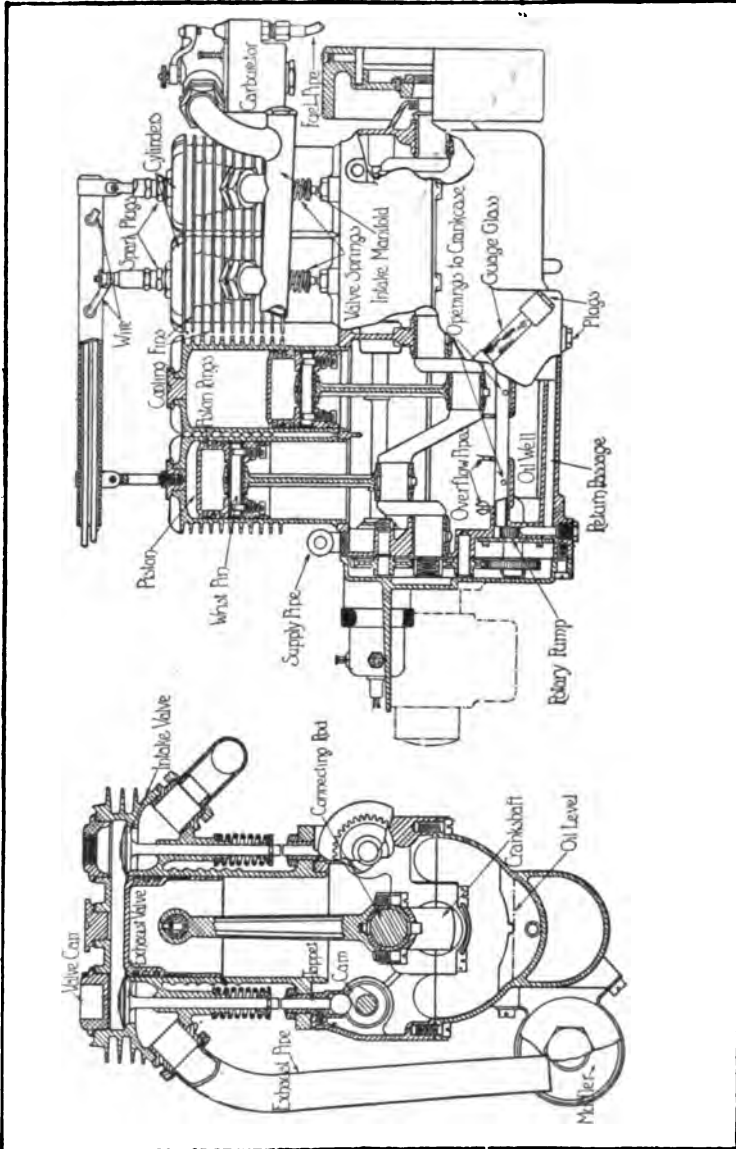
Sectional view of Pierce four-cylinder motorcycle power plant.
